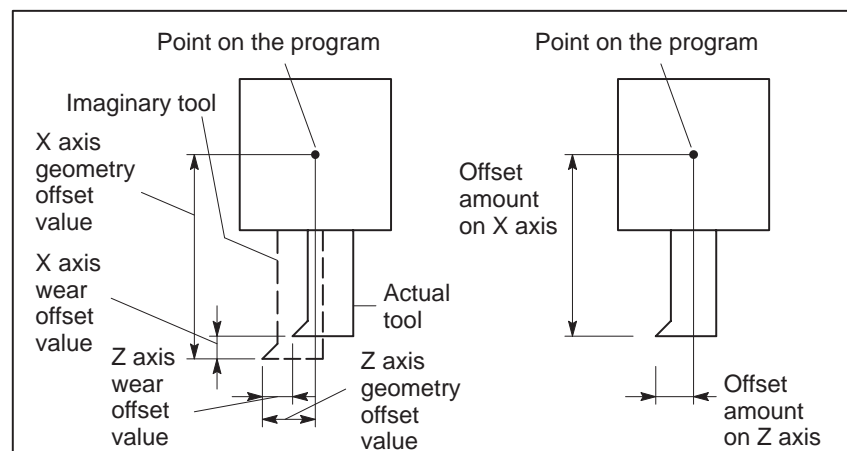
(a) Difference the tool geometry offset from tool wear offset
